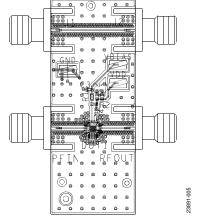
ADL8104-EVALZ Assembly Drawing (J1 and J2 are Not Installed)
